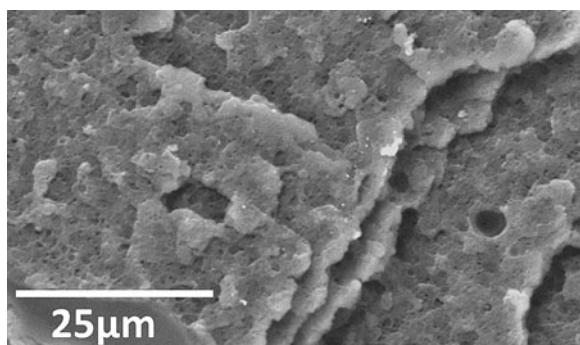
Representative fracture surface of a tensile specimen printed from ABS.
